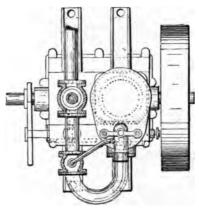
Allsop heavy-freight petroleum vehicles. Plan view of engine.
